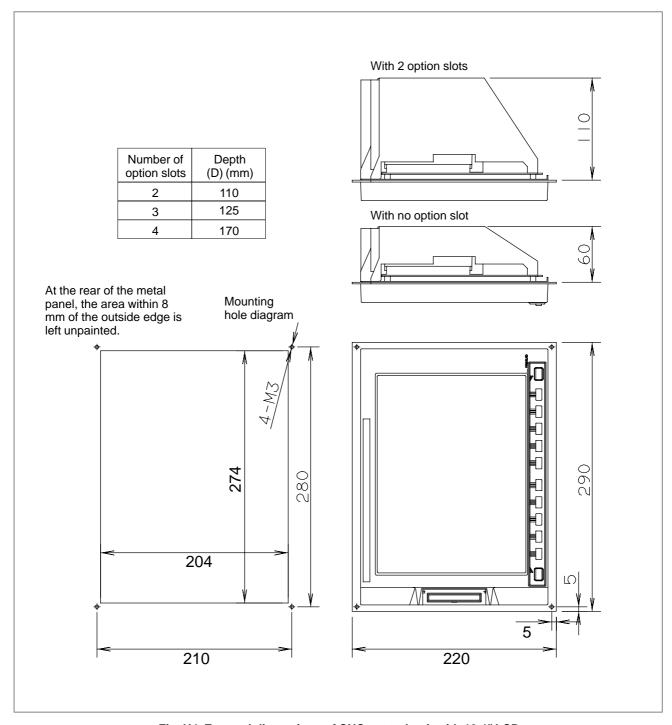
External dimensions of CNC control unit with 10.4" LCD
